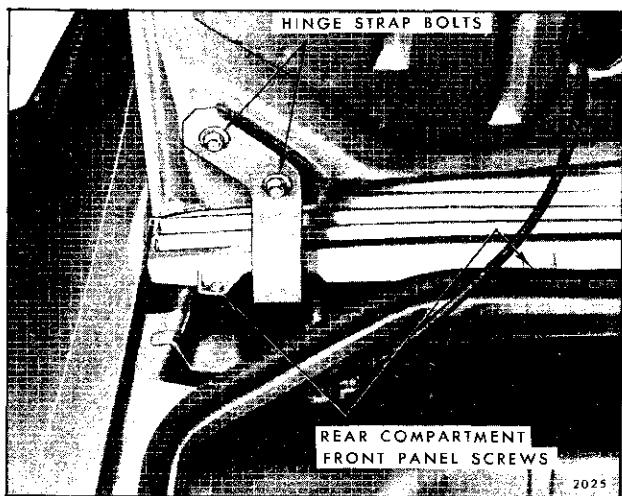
Rear Compartment Front Panel Screws — Oldsmobile and Buick "E" Styles
